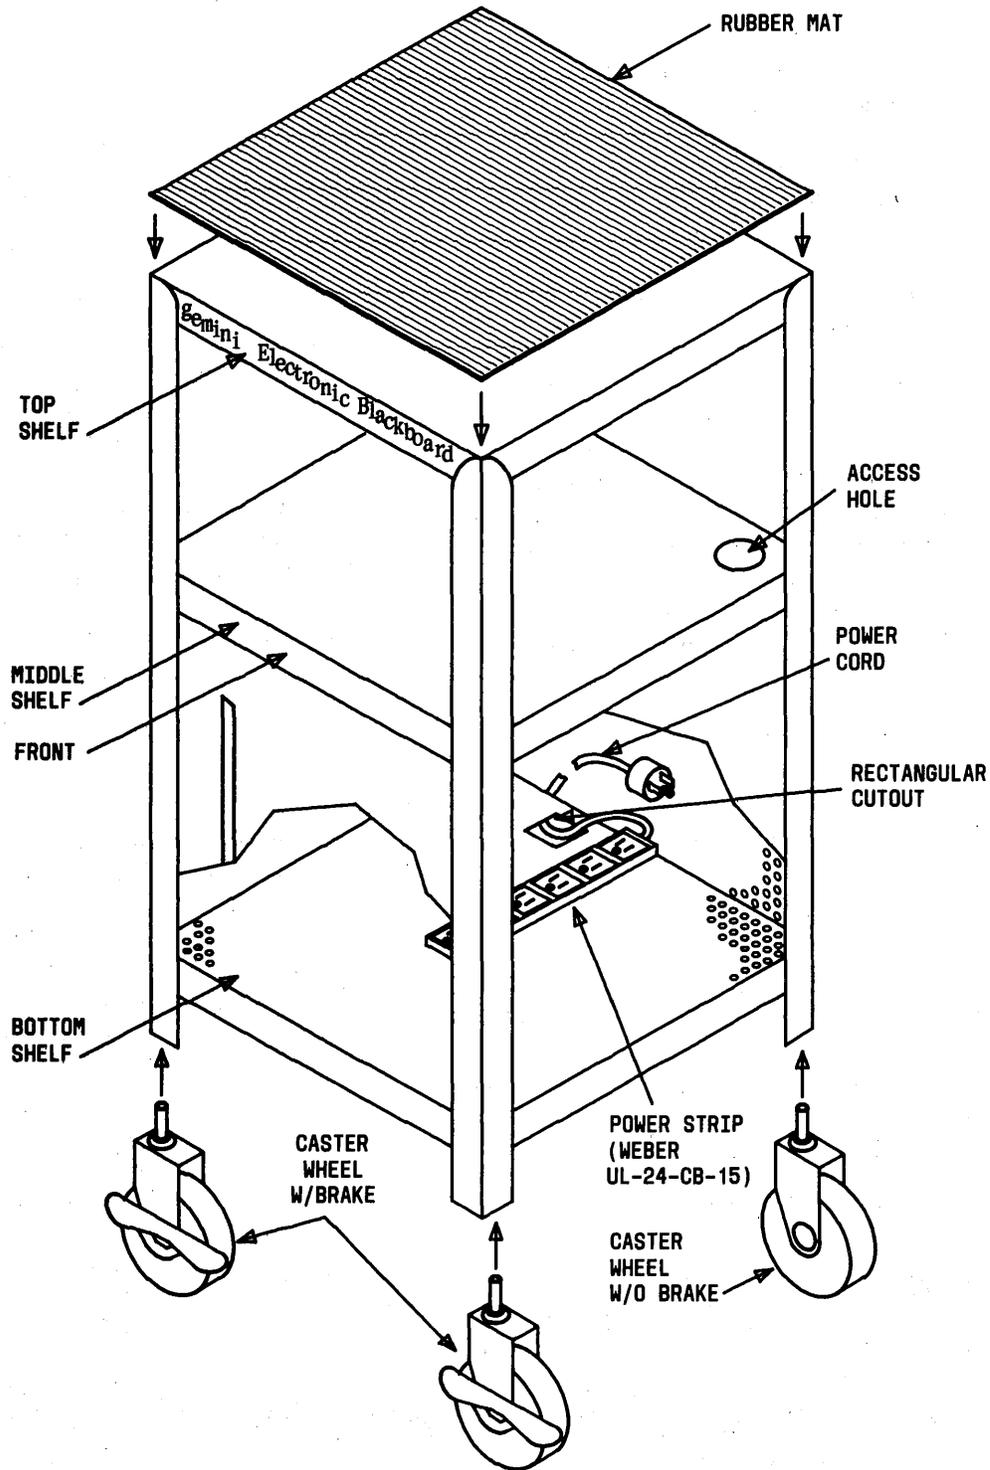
KS-21888 Cabinet Assembly Arranged for KS-21889-L1 Memory Unit
